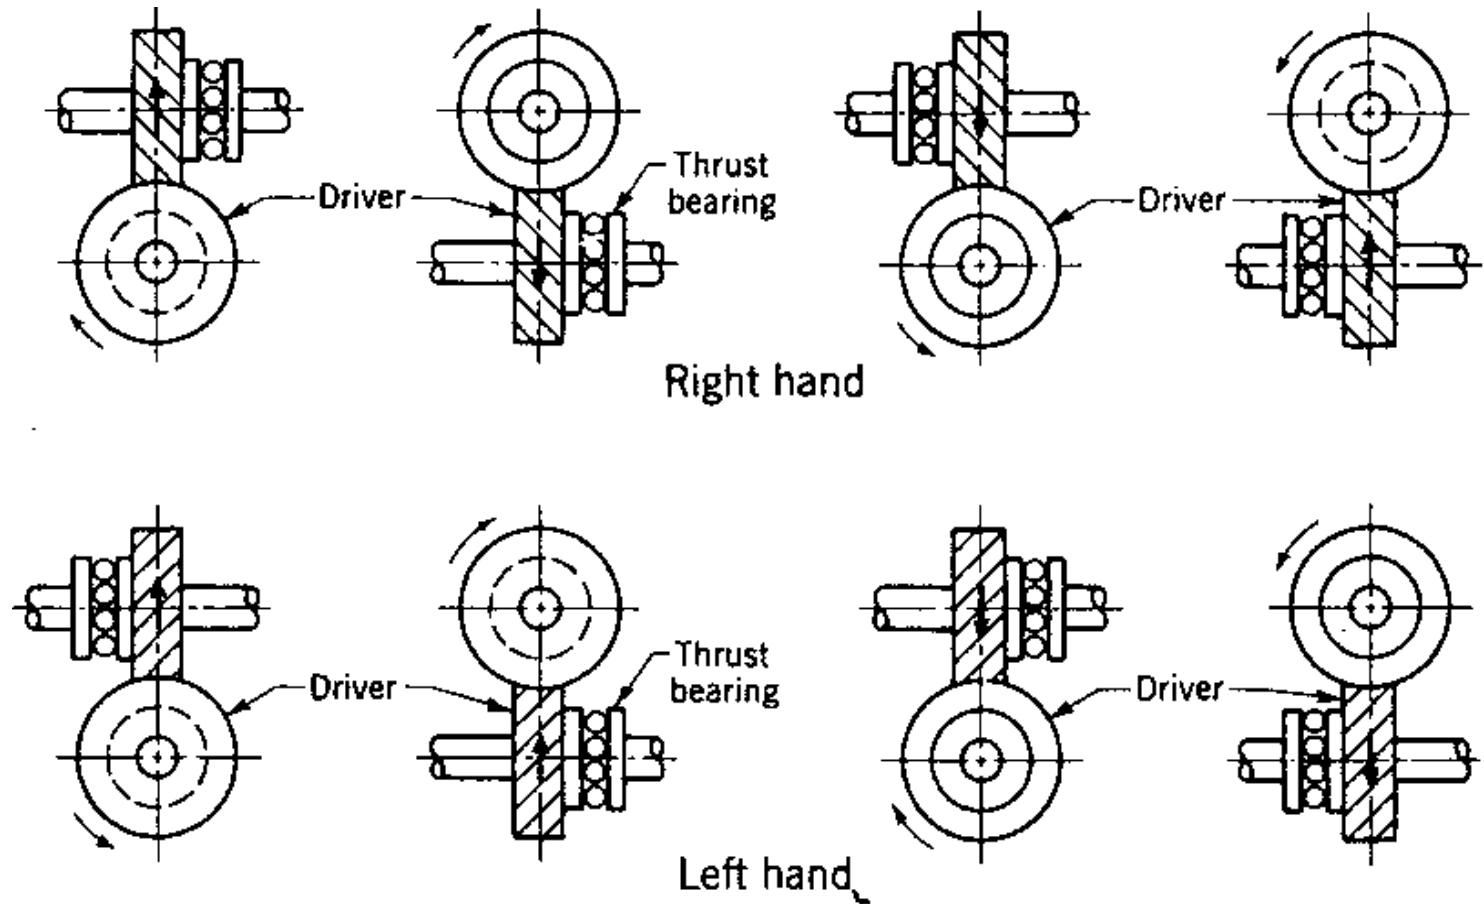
Thrust, rotation, and hand relations for crossed-helical gears.
